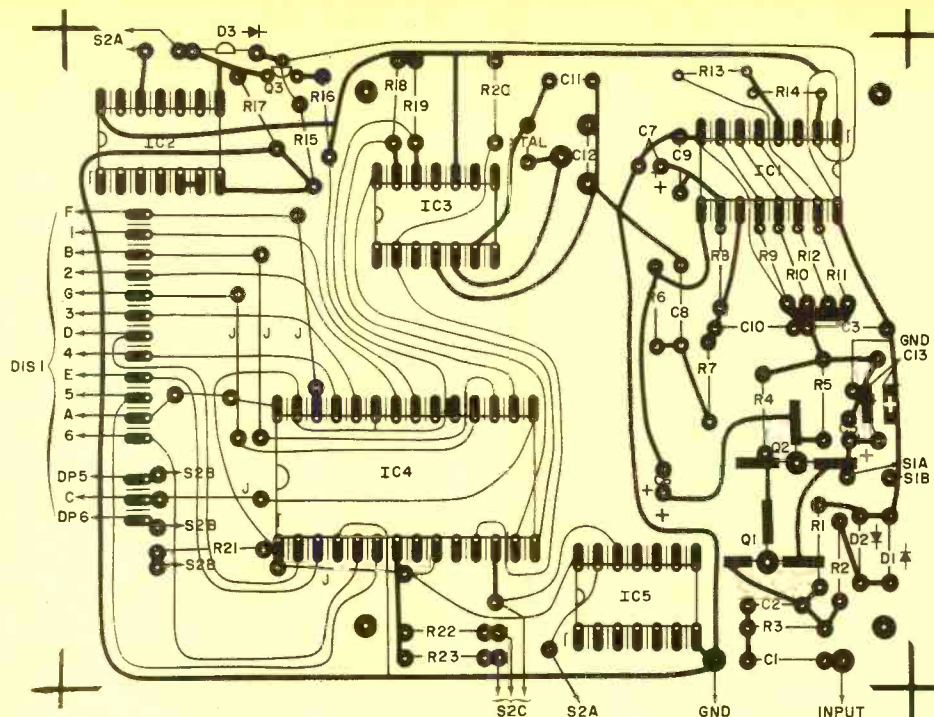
Etching and drilling guide for pc board (left) and component layout (above).
